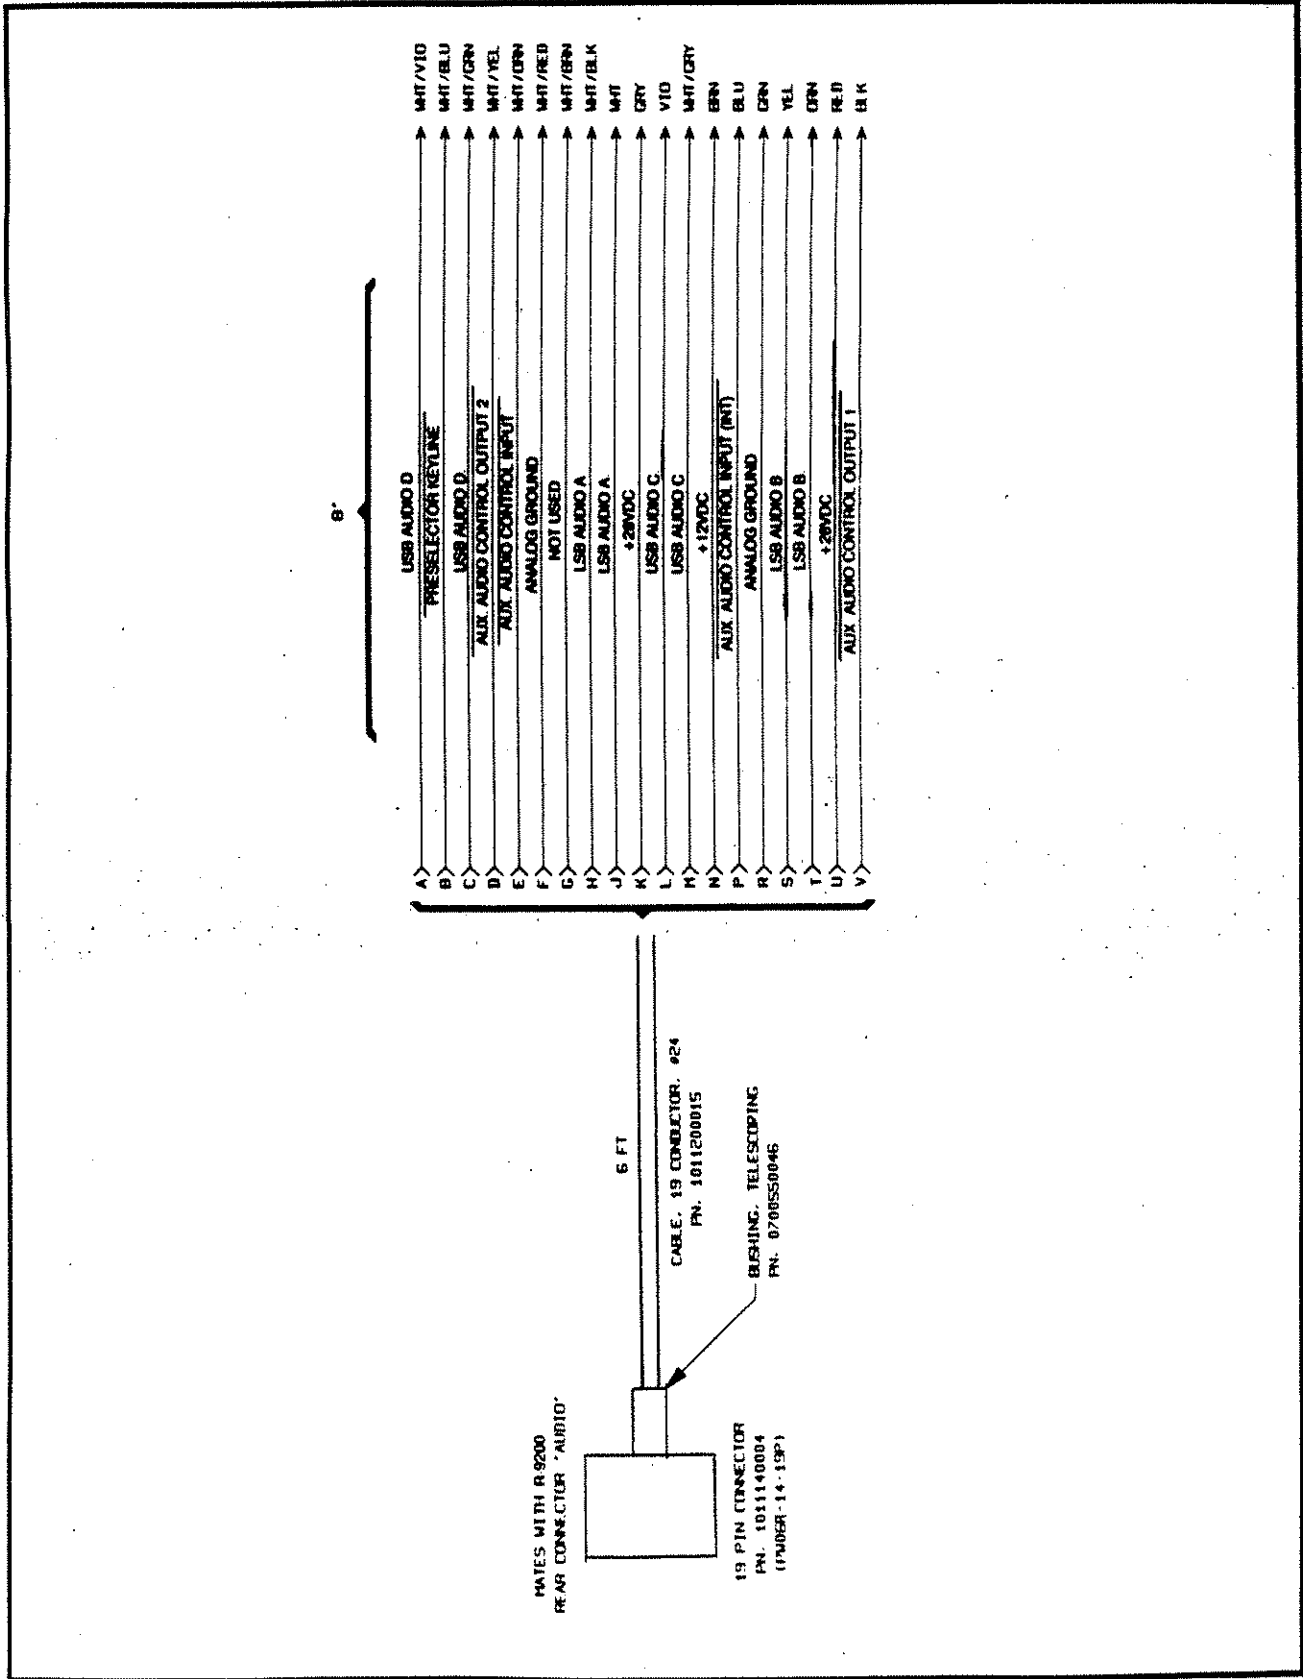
Cable Assembly, R-9200 Audio Interface.
